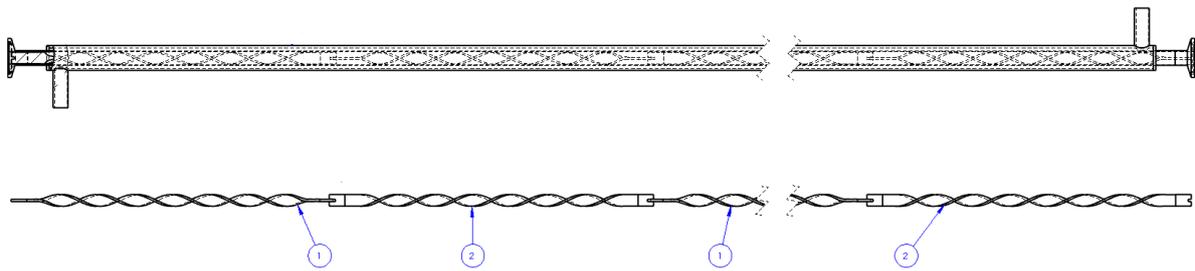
Static mixer elements (4 elements per tube - two types (1 & 2), two of each type). Types 1 and 2 twist in the opposite sense to improve mixing. Mixer elements are shown inside a heat exchanger tube (above) and separately (below).
